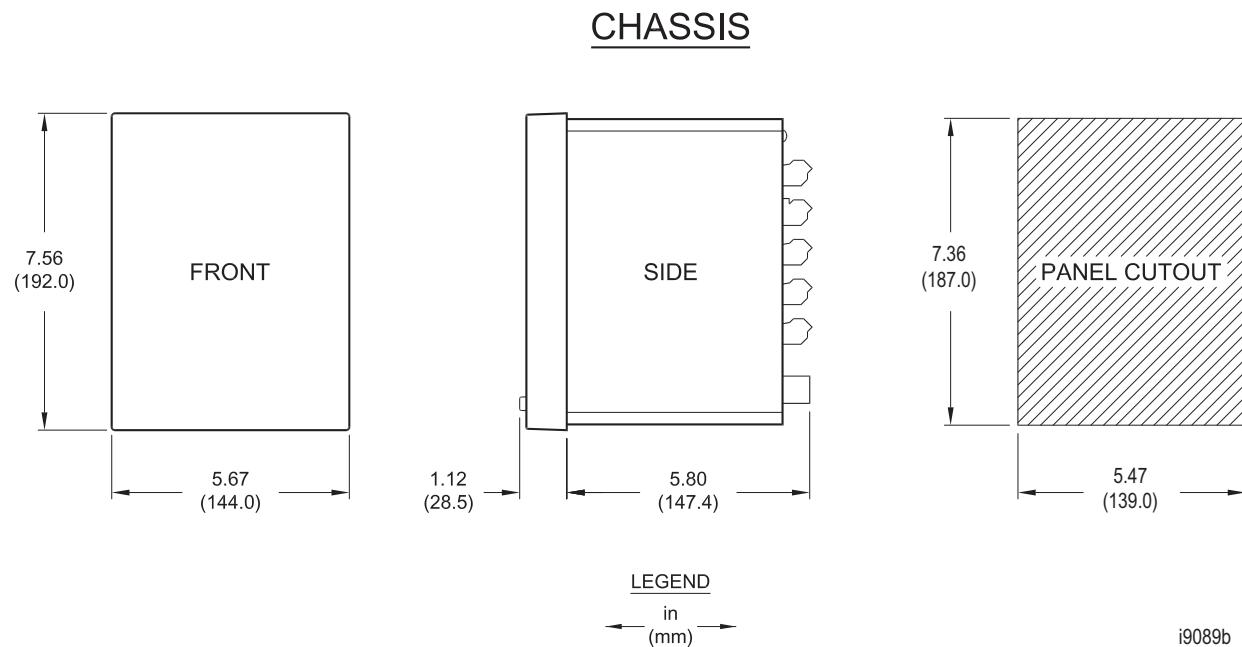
SEL-751 Dimensions for Rack- and Panel-Mount Models
